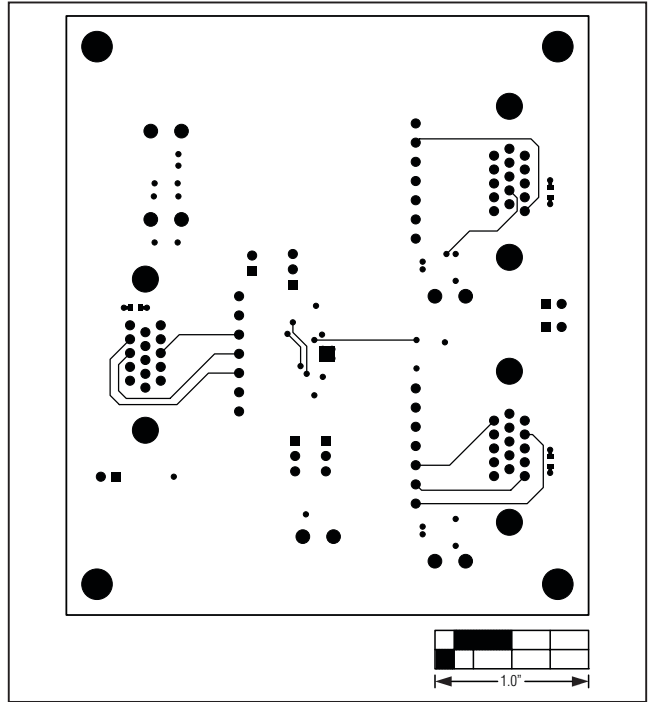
MAX4885AE EV Kit PCB Layout—Solder Side
